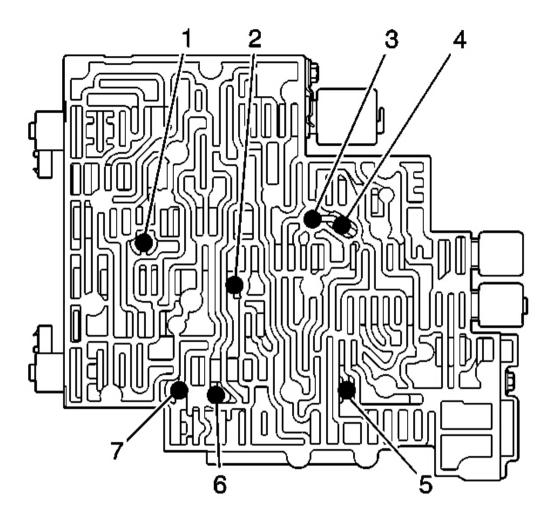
Locating Seven Valve Body Check Balls Courtesy of GENERAL MOTORS CORP.
